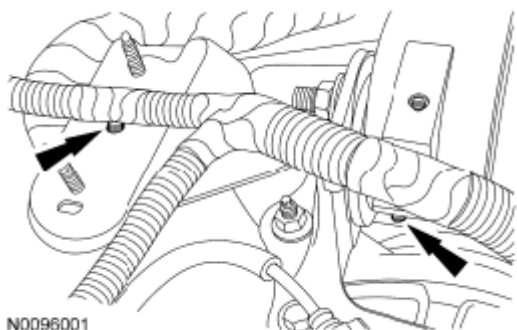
Locating Negative Battery Cable Pin-Type Retainers
